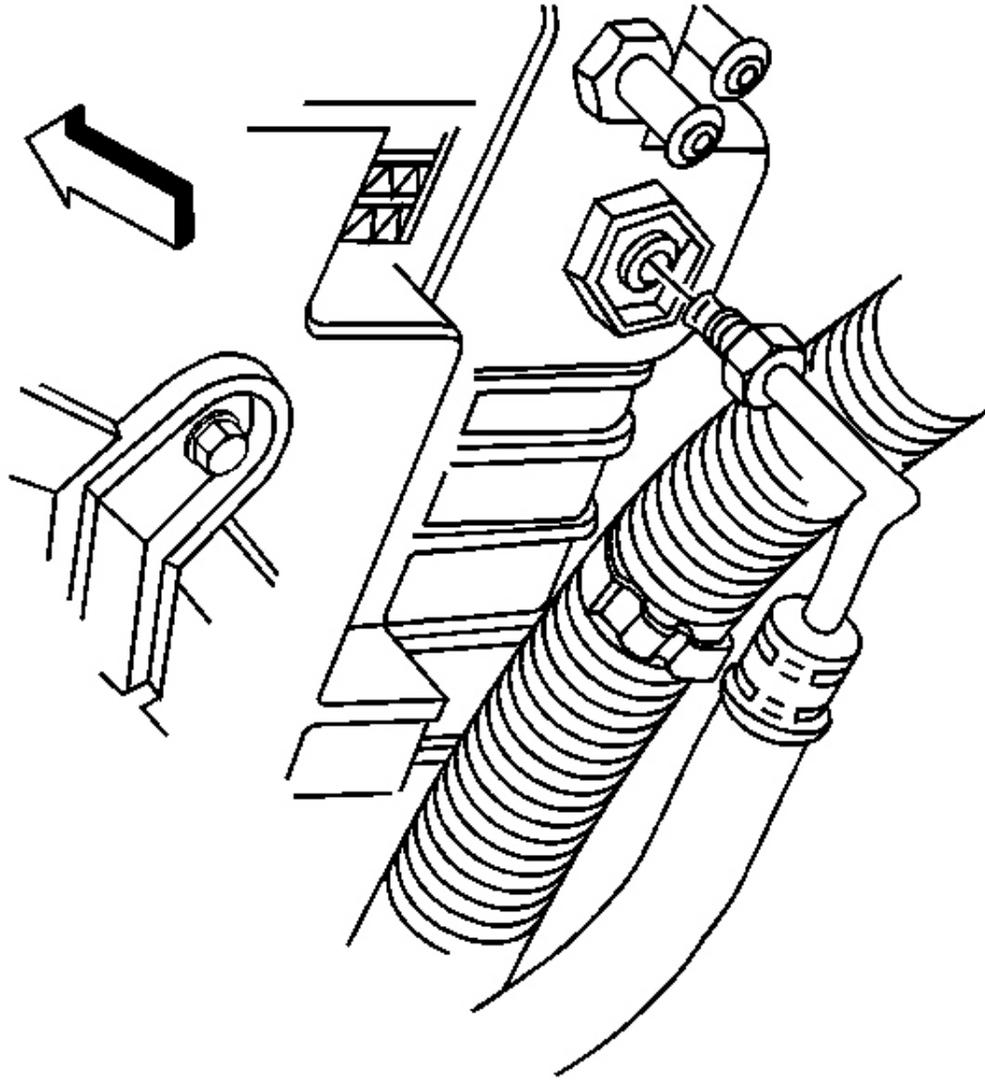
Automatic Transmission Oil Cooler Lines At Radiator
